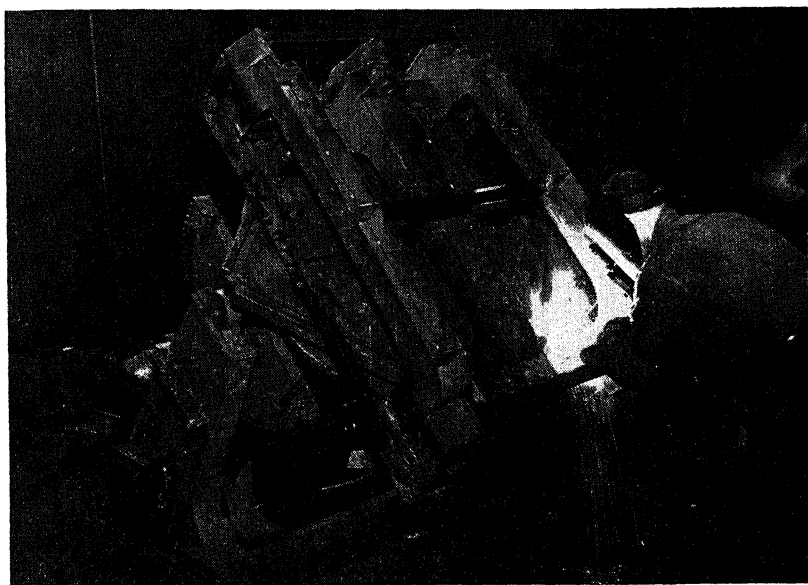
Motor operated revolving tilting welding table. Permits down-hand welding of all joints in machine parts such as shown for substantial savings in welding time.
